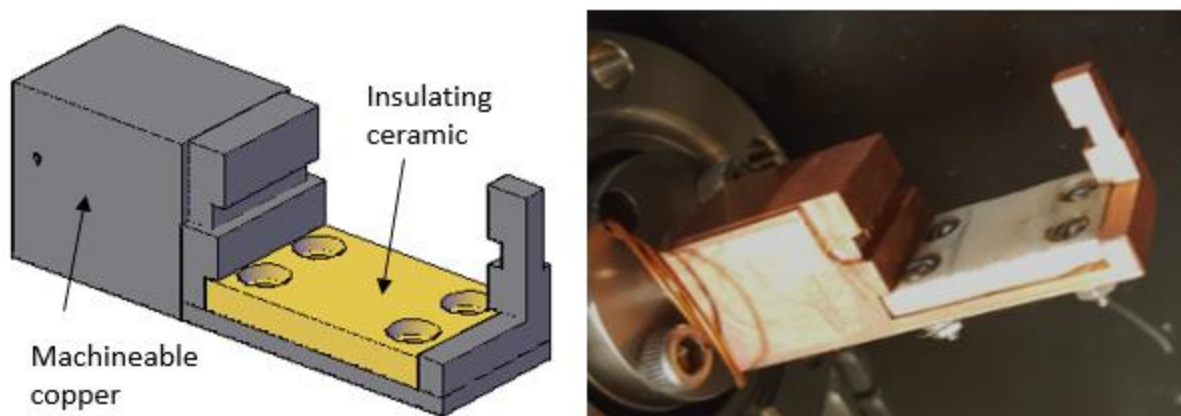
(left) 3D CAD drawing of the sample heating stage that has been designed. The main piece is made from machineable copper. The yellow plate is made from machineable ceramic and insulates the heater and thermocouple connections from the frame. This piece was manufactured by the Physics Machine Shop (right). The finished heating stage, connected to the linear manipulator.
